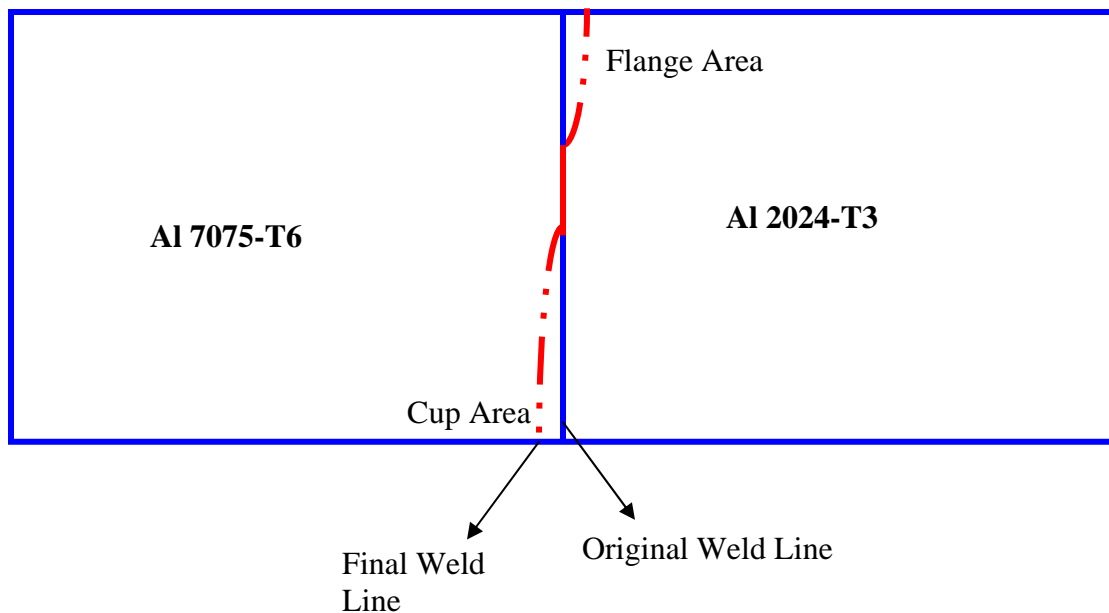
Weld Line Movement in Al 7075-T6 and Al 2024-T3 blanks
